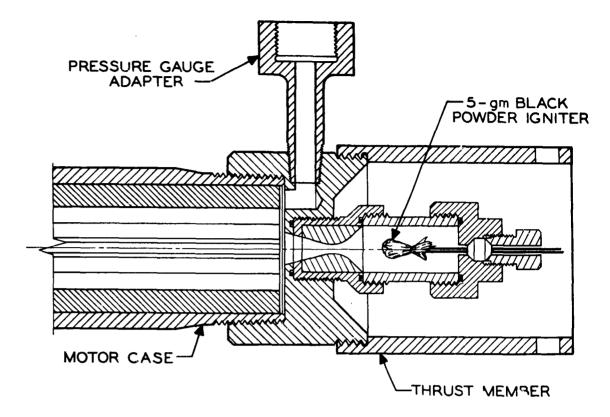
Bag igniter in a forward-mounted pyrogen assembly.
